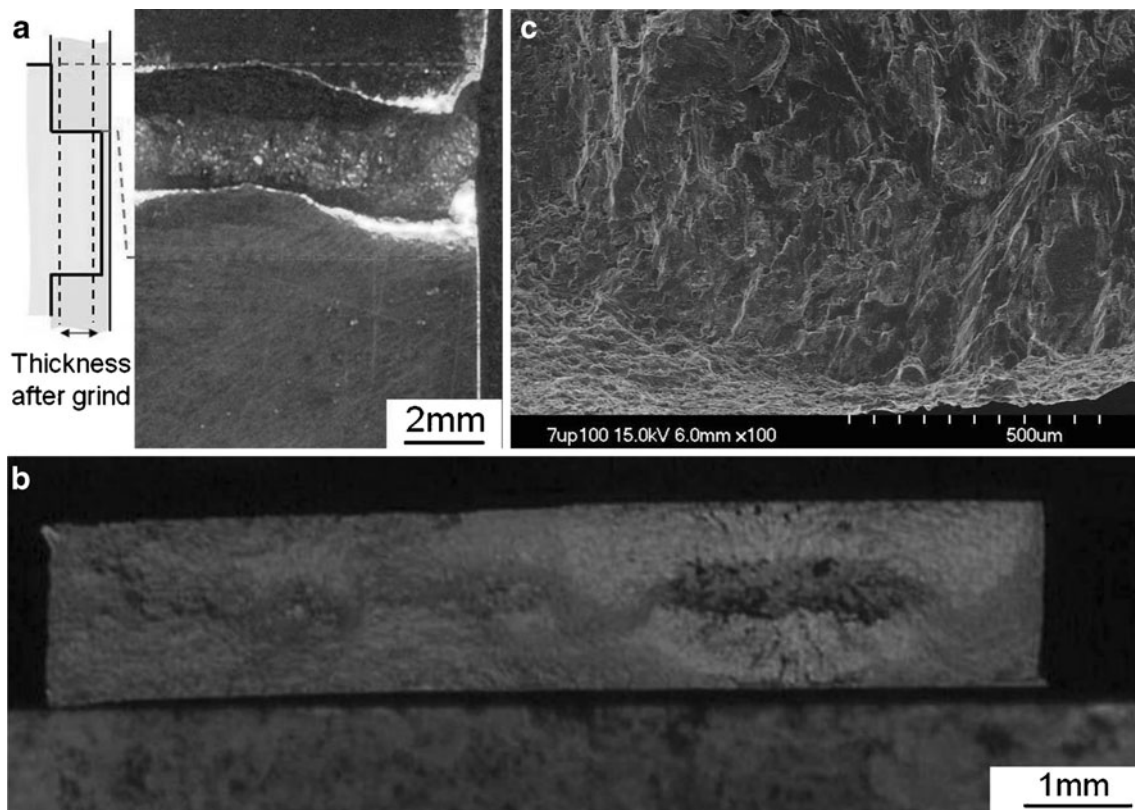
Typical fracture surface in case crack forms at inside of specimen. a Fracture location. b Fracture surface. c Crevice surface
